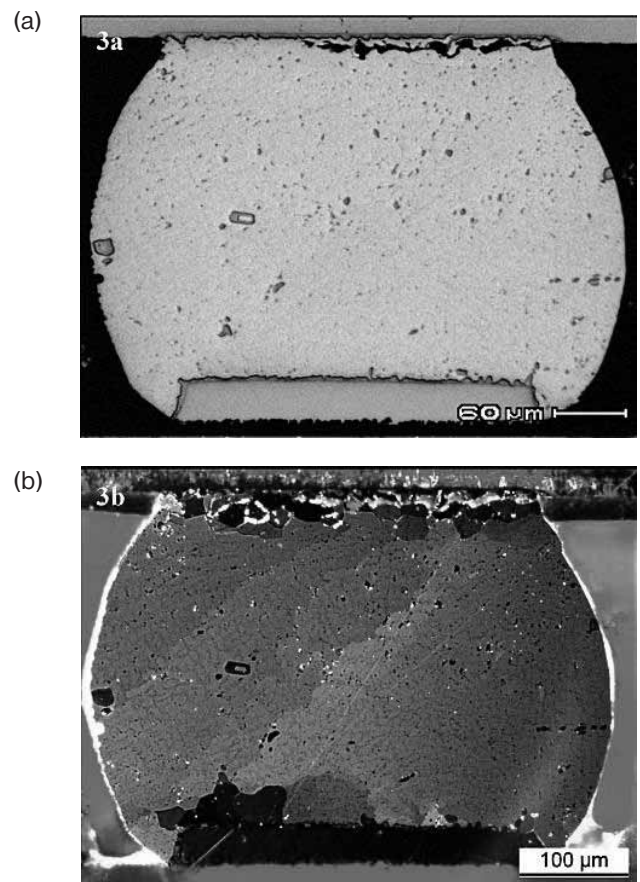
Thermal cycle results (-40/125 OC) of SAC305 solder bump for a CSP BGA (Mattila et al.)
